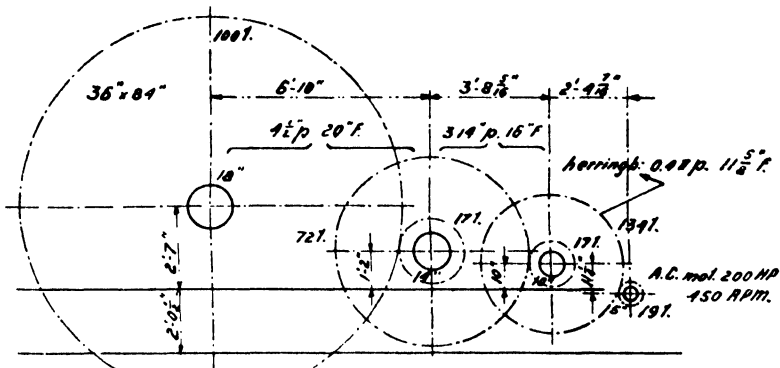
Individual Gear for an Electrically Driven Mill.
